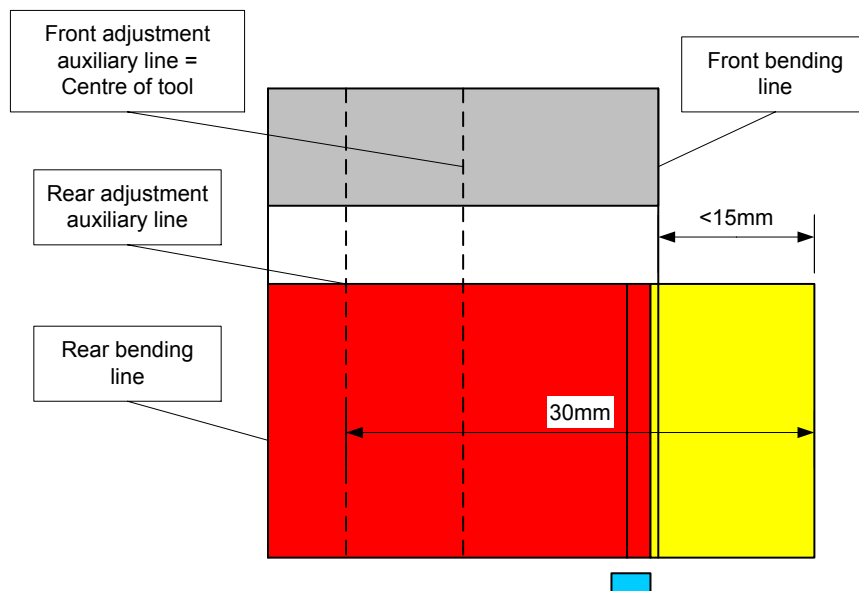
Protected field⁶ for stamping tools of tool class 2
